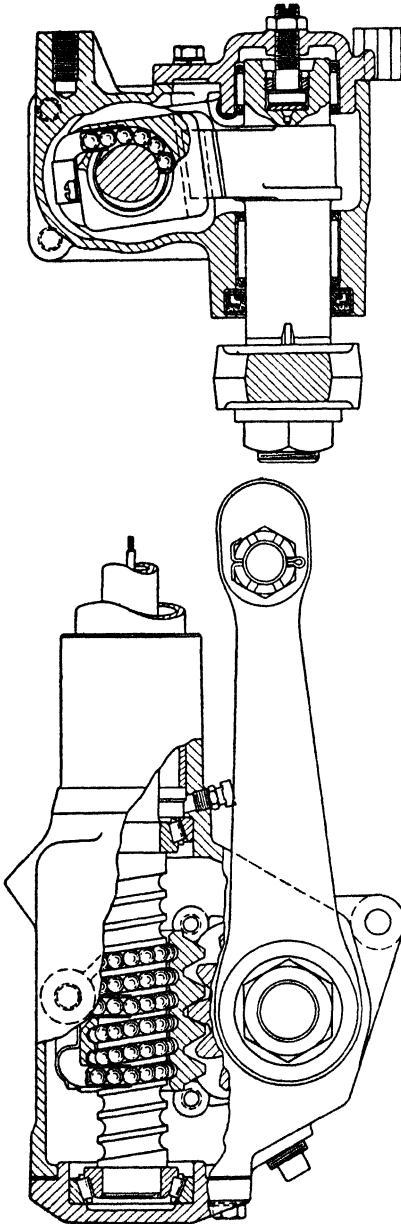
SAGINAW BALL-NUT STEERING GEAR.
